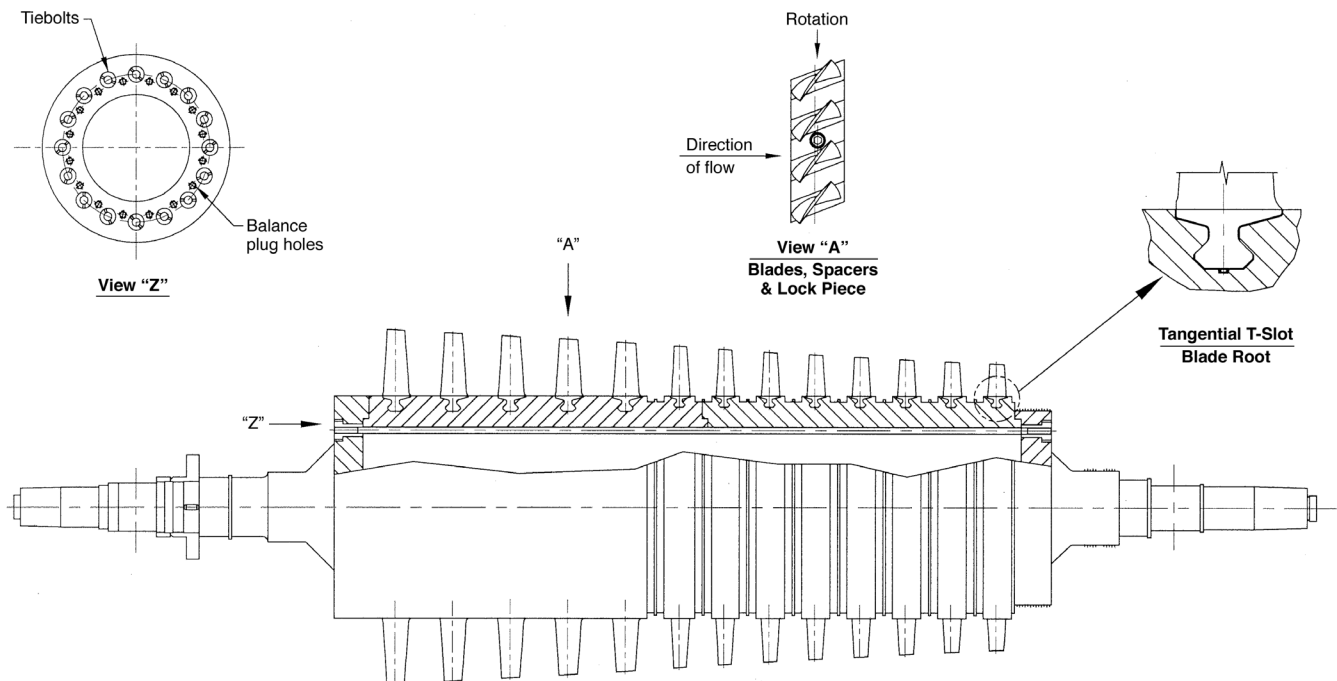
Axial Compressor Rotor Construction: Drum Rotor with Tie Bolts
